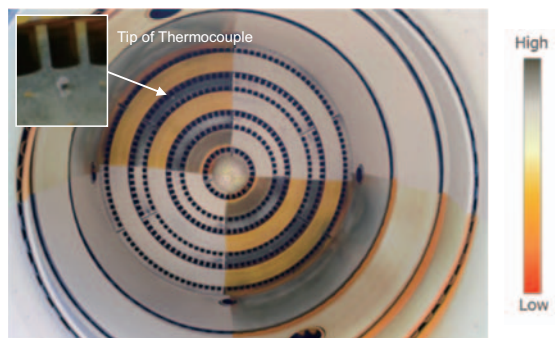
Pictures of inside combustor parts after 1<sup>st</sup> engine test and tip of thermocouple for gas temperature measurement at AGP
